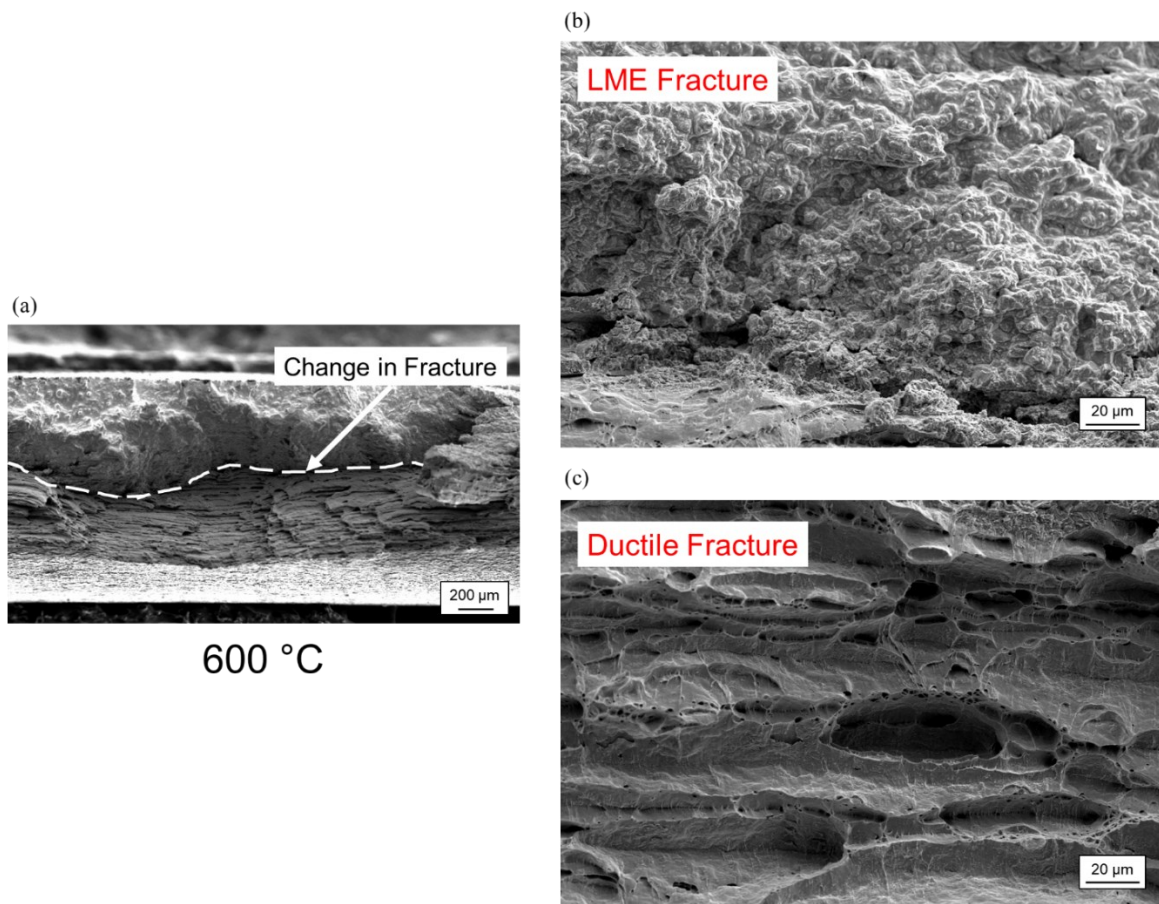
(a) fracture surface of 600 °C case showing distinct fracture regions (b) LME fracture region (c) ductile fracture region
